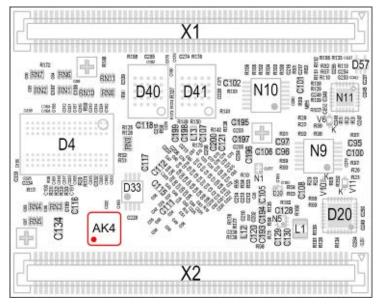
TQMLS1028A assembly revision 01xx, bottom
